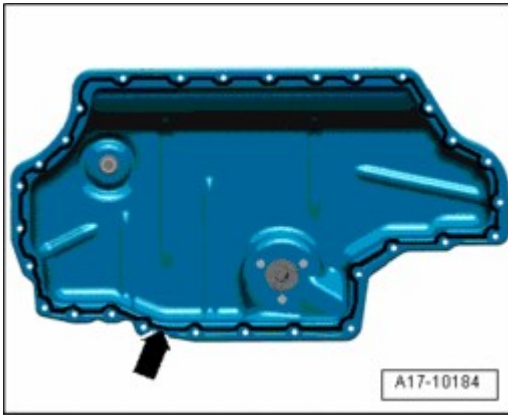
Applying Sealant Bead On Clean Sealing Surface Of Lower Part Of Oil Pan
